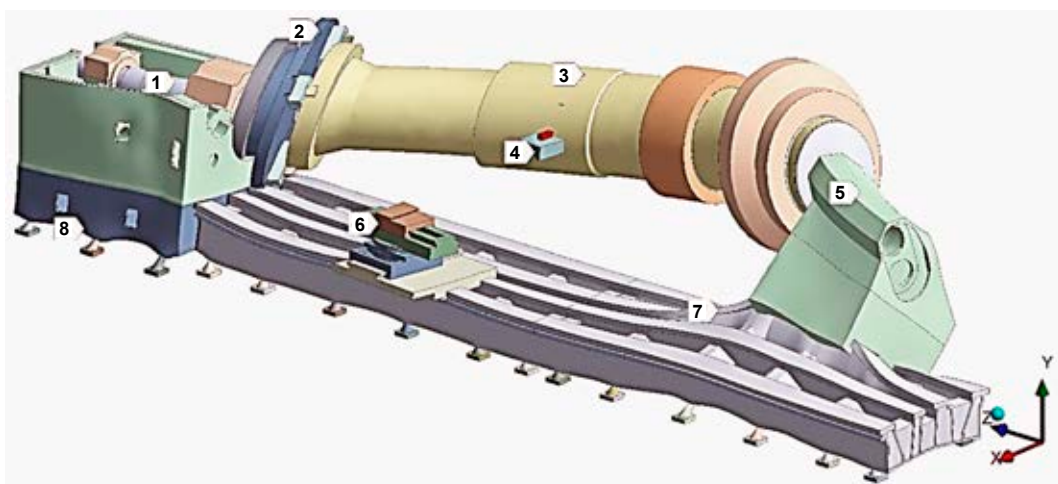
FEA-model of the HPL during resonance by horizontal bending eigenmode $Mh1$ (17.78 Hz): 1 – spindle into headstock bearing rests, 2 – chuck (table), 3 – machined rotor (rotor-shaft), 4 – tool into tool-holder, 5 – tailstock, 6 – support as slider pile, 7 – bed, 8 – boot
